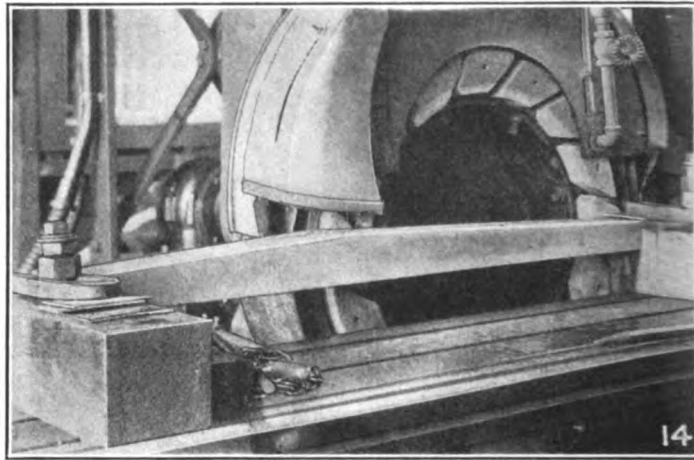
GRINDING CROSSHEAD GUIDE-BARS
